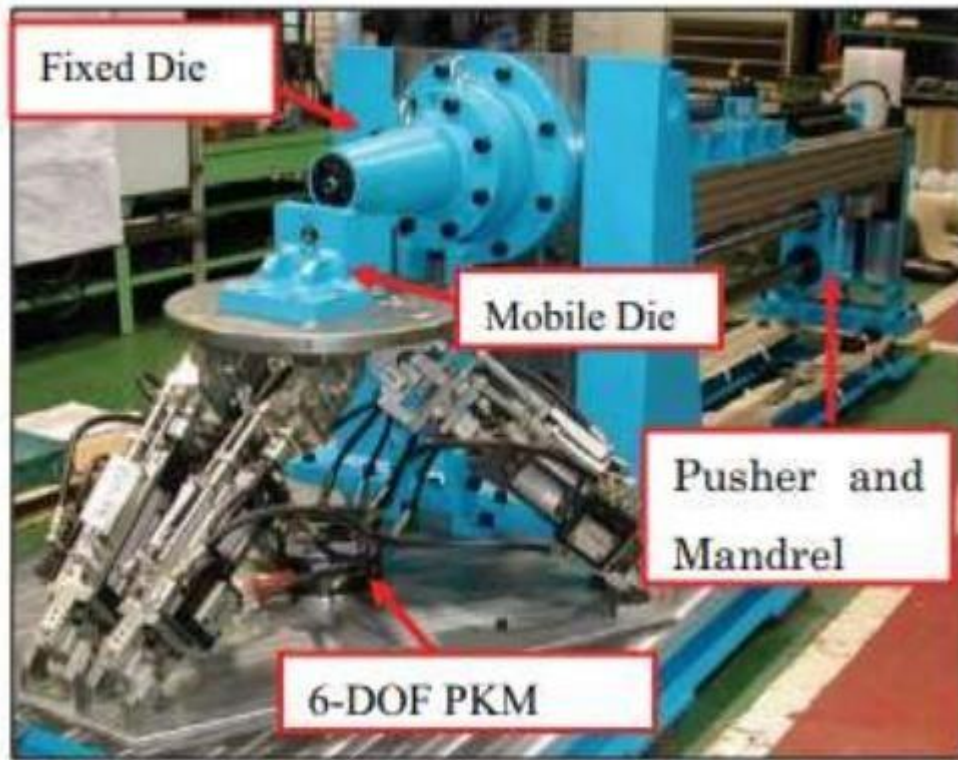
The Proposed Bending Machine (Goto, 2008)
